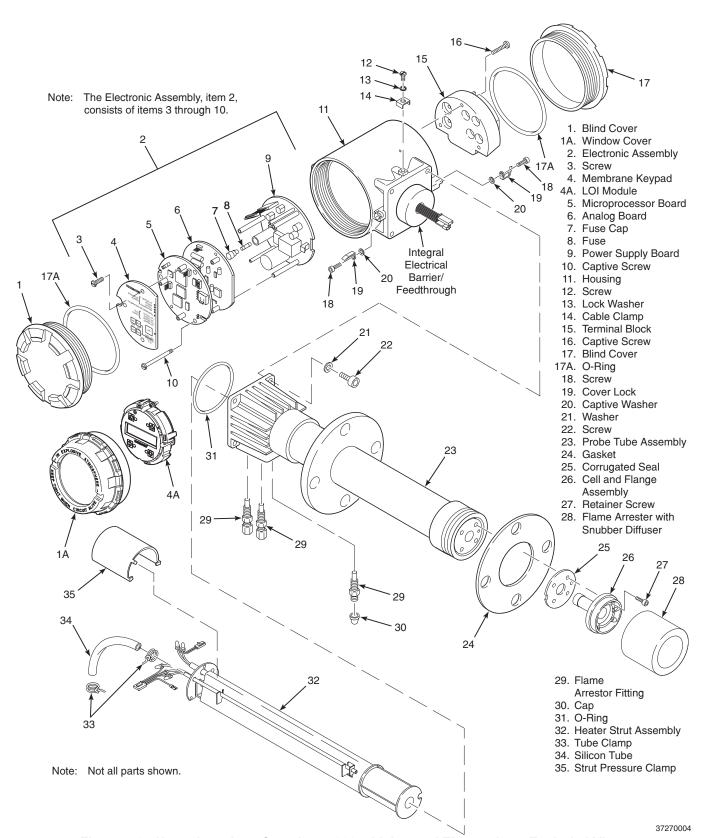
Hazardous Area Oxymitter 4000 with Integral Electronics - Exploded View
